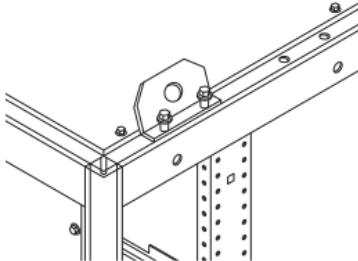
Lifting Brackets on Top of Switchboard Sections.
